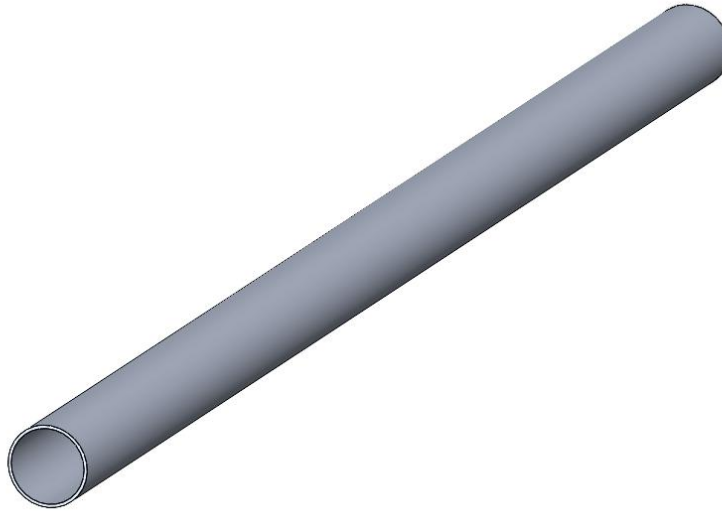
17: ISOMETRIC VIEW OF THE REAR AXLE 3D CAD MODEL.
